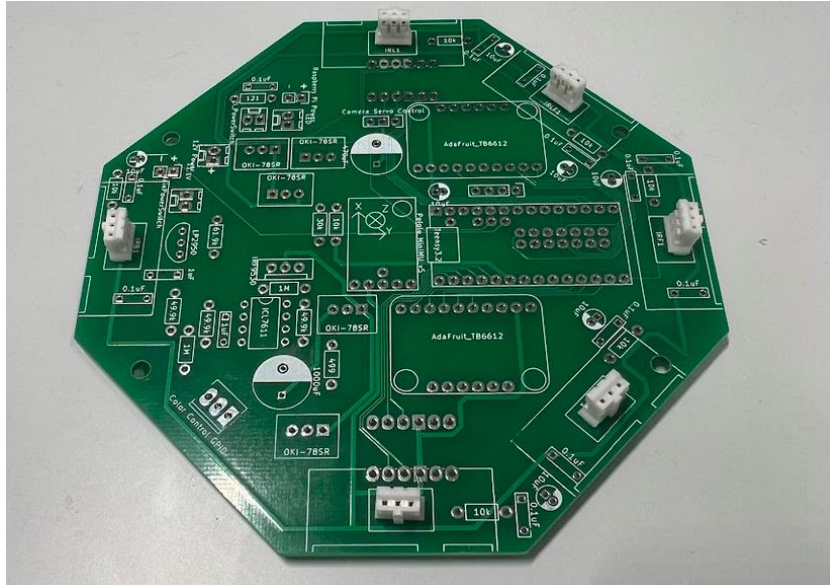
PCB board with IR transceiver mounts attached.
